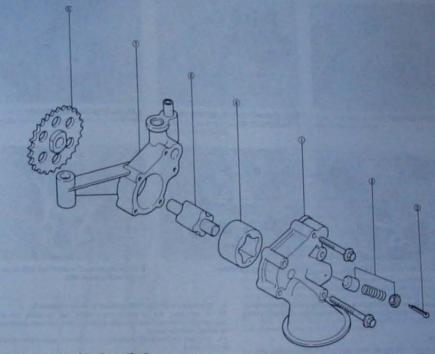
Exploded view of the oil pump (Sec 8)
